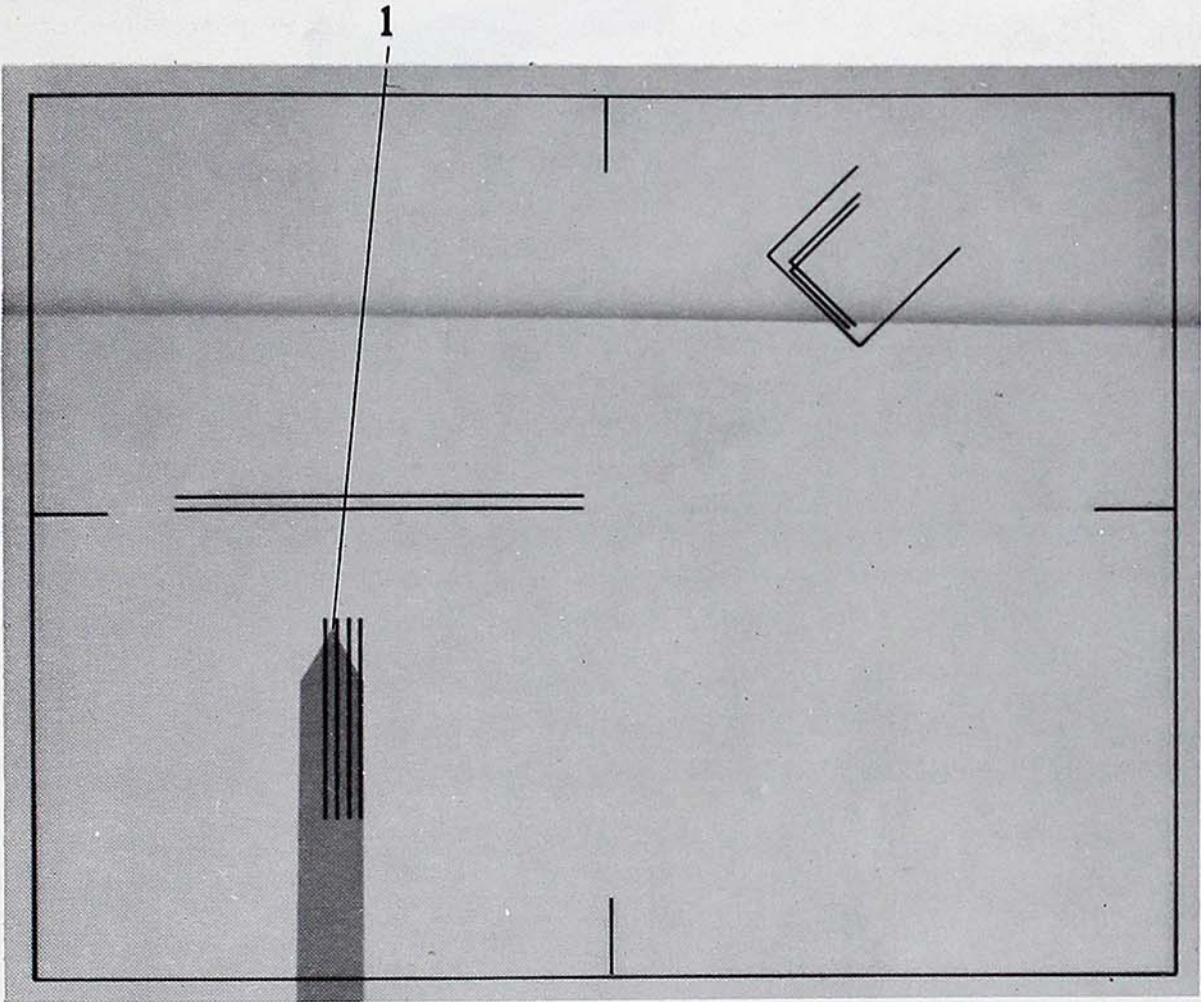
Rear Sight - Initial Setting and Check of the Short Range Sight Hole Locating Dimension from the Hub Face.
